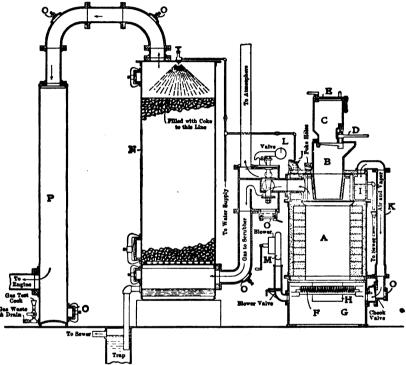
Section of Fairbanks-Morse Suction Gas-Producer.
